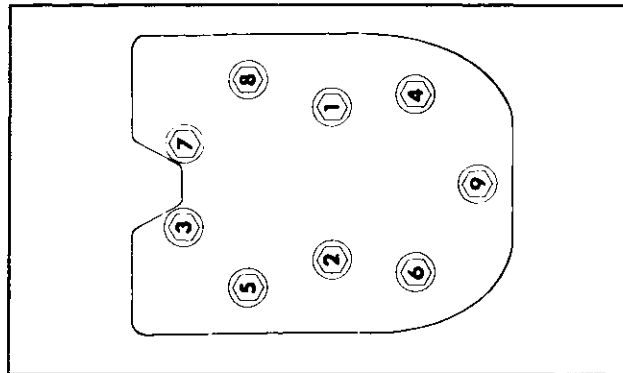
Cylinder Head Fastener Tightening Sequence.
